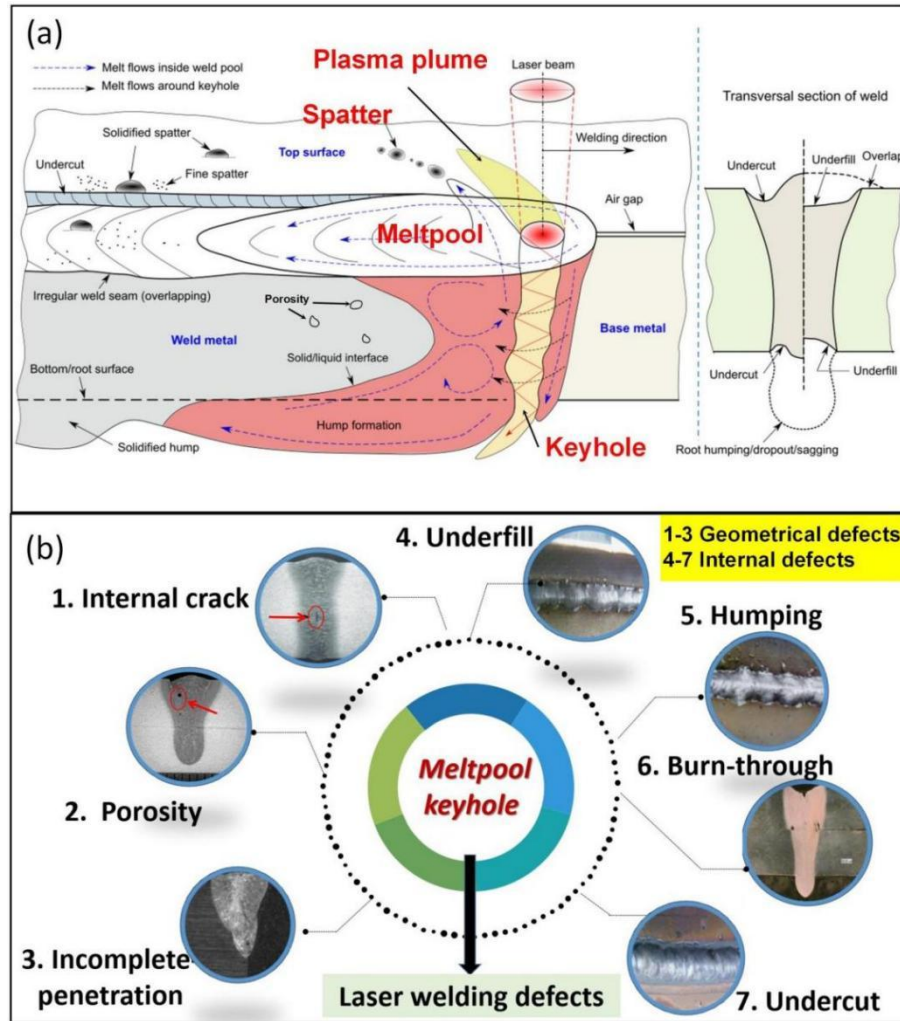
Schematic illustration (a) of laser beam keyhole welding during full-penetration [24] and (b) examples of common welding defects.
